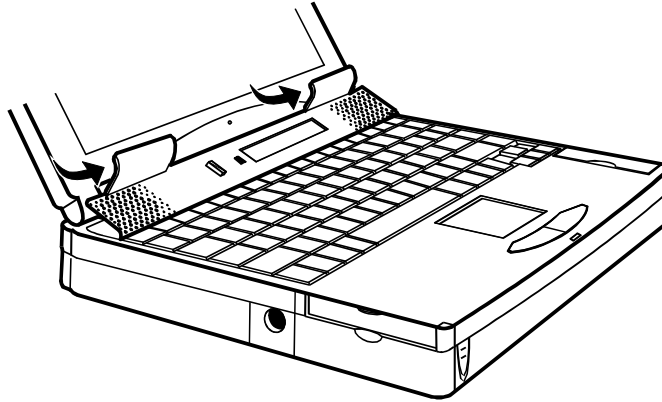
REMOVING THE INDICATORS PANEL
